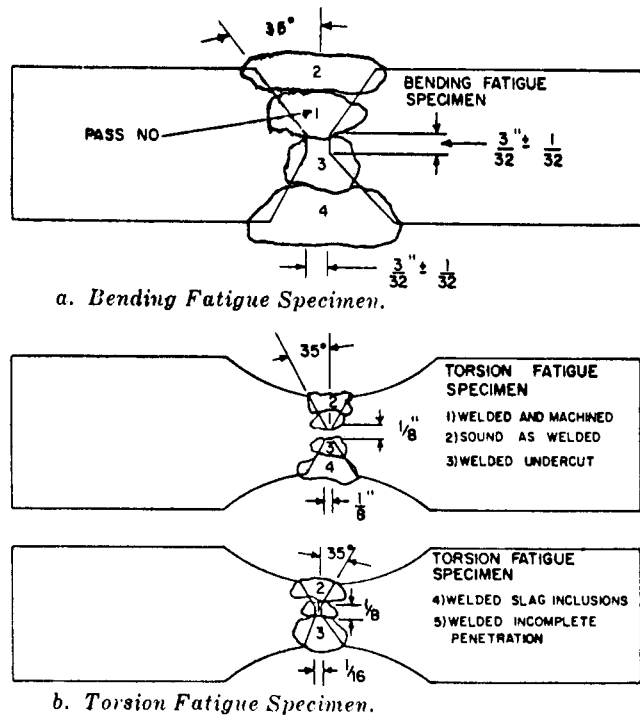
Sketch of weld joint design (not to scale) for fatigue specimens (28).
